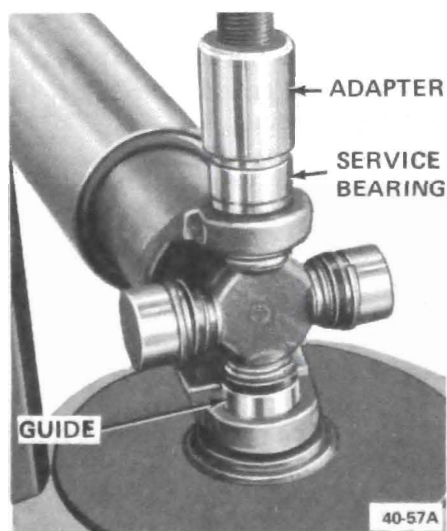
Installing U-Joint Bearing With Guide in Place.
